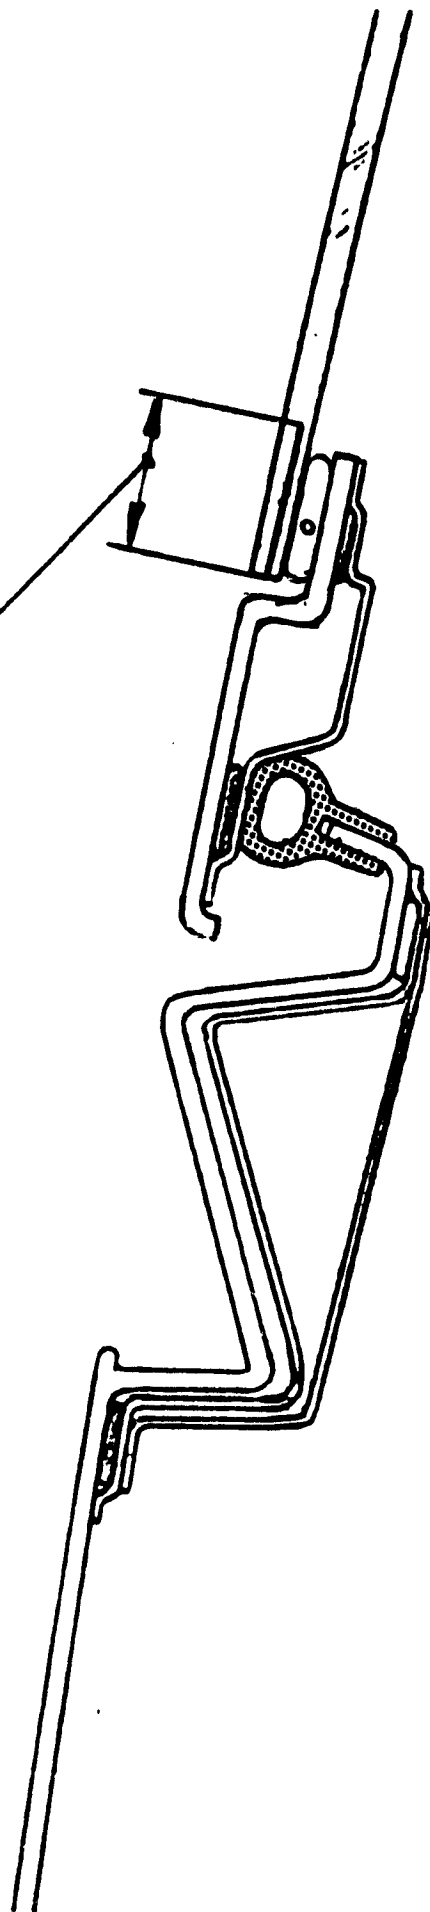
FIFTH DOOR CENTER SECTION
